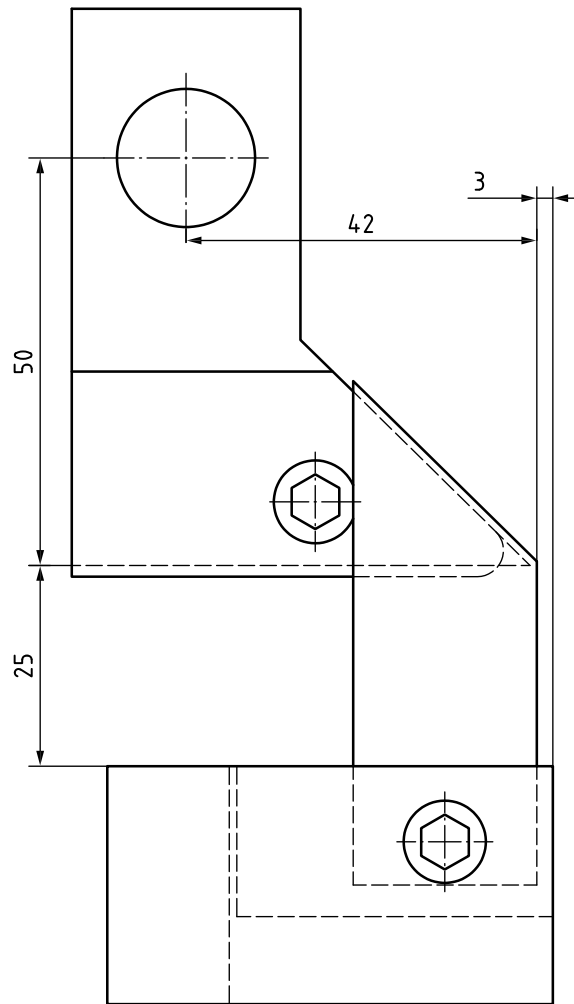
Test apparatus in starting position with the test specimen clamped in place
